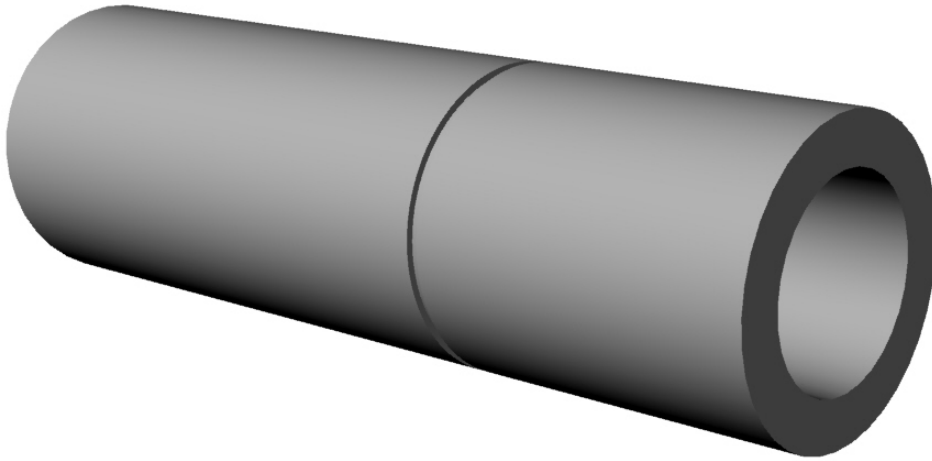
Part 4 – Chamber Insert (CAD Drawing)
